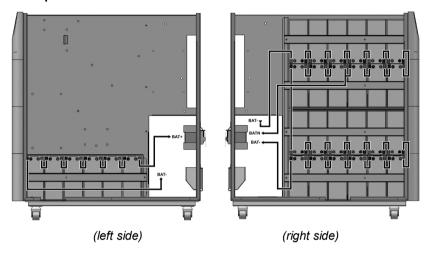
30 pieces of 7-9AH Battery Placement and Connections
